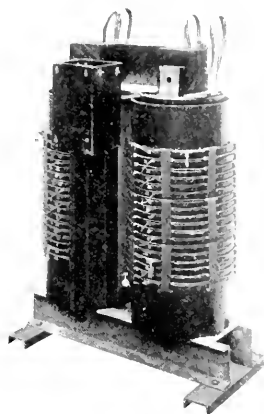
ALL COILS ASSEMBLED ON TRANSFORMER
